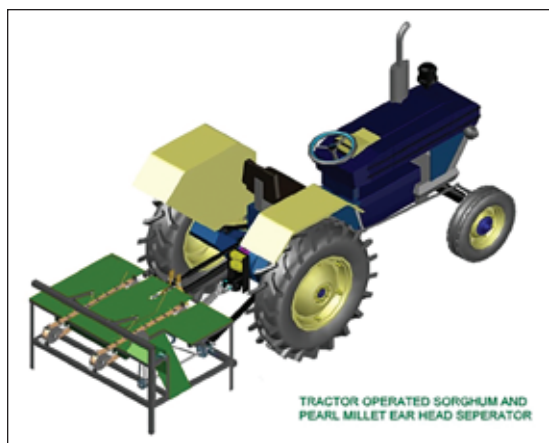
Tractor Operated Sorghum and Pearl Millet Ear Head Separator
